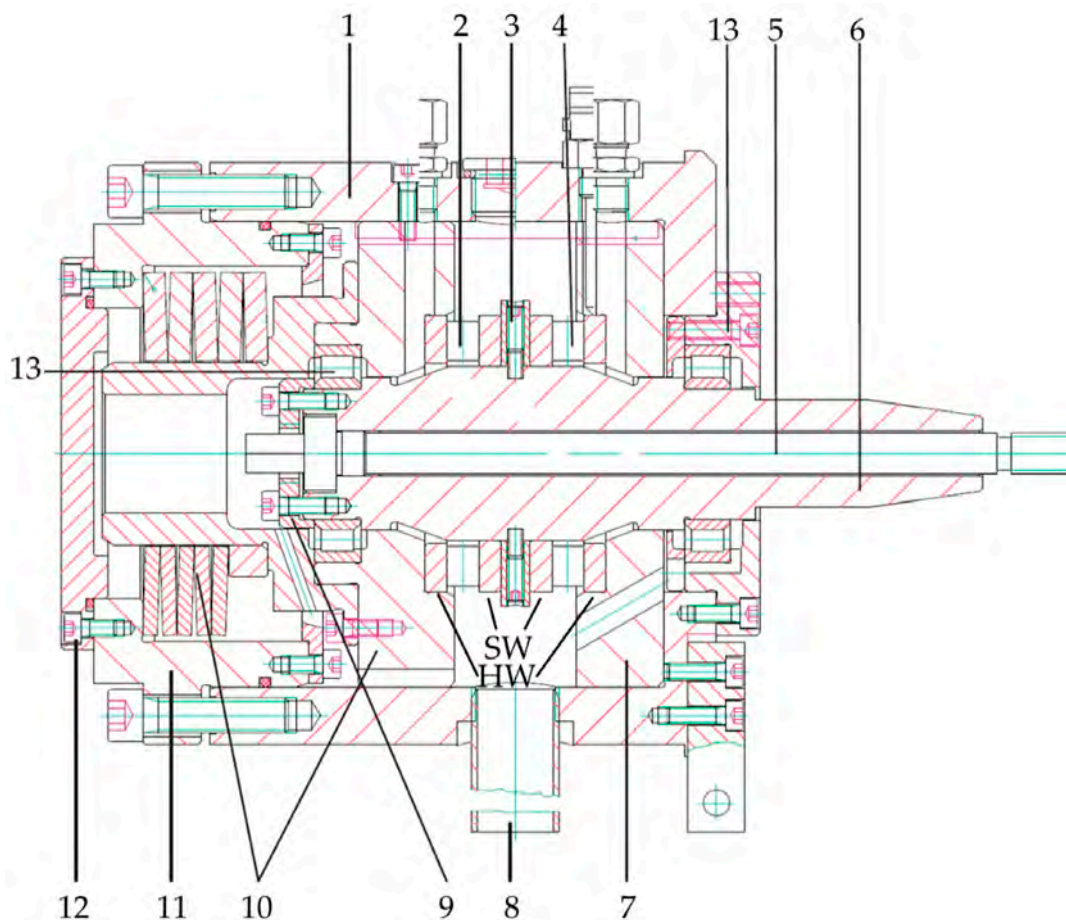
A schematic of the test head with axial cylindrical roller bearings. 1. Housing. 2. Test bearing 2 (test head sided bearing). 3. Spacer. 4. Test bearing 1 (motor sided bearing). 5. Shaft. 6. Clamping bolt. 7. Bearing seat. 8. Drain pipe. 9. Cap. 10. Bearing support with screwed-on pilot pin. 11. Lid cup of spring package. 12. Lid. 13. Auxiliary bearing. Both test bearings consisted of a stationary housing (HW) and a rotating shaft washer (SW). The housing and the shaft washer are indicated in this schematic by HW and SW. Figure adapted with permission from Ref. [35]. Copyright 2017, Schaeffler Technologies AG & Co.
